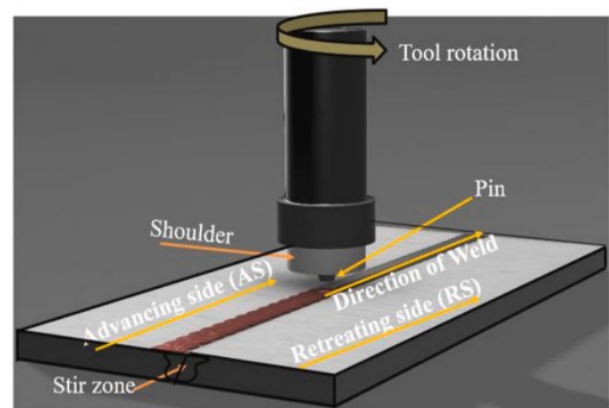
Schematic illustration of the friction stir welding process [21]
